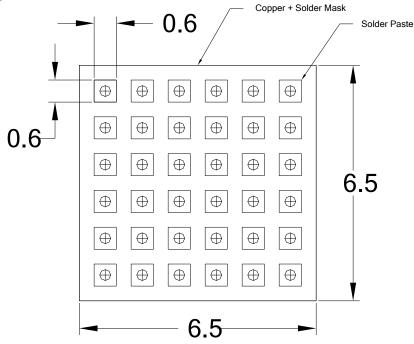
PD69208T4 Bottom layer Copper and Solder Paste Recommended PCB Layout for Thermal Pad Array (mm)
